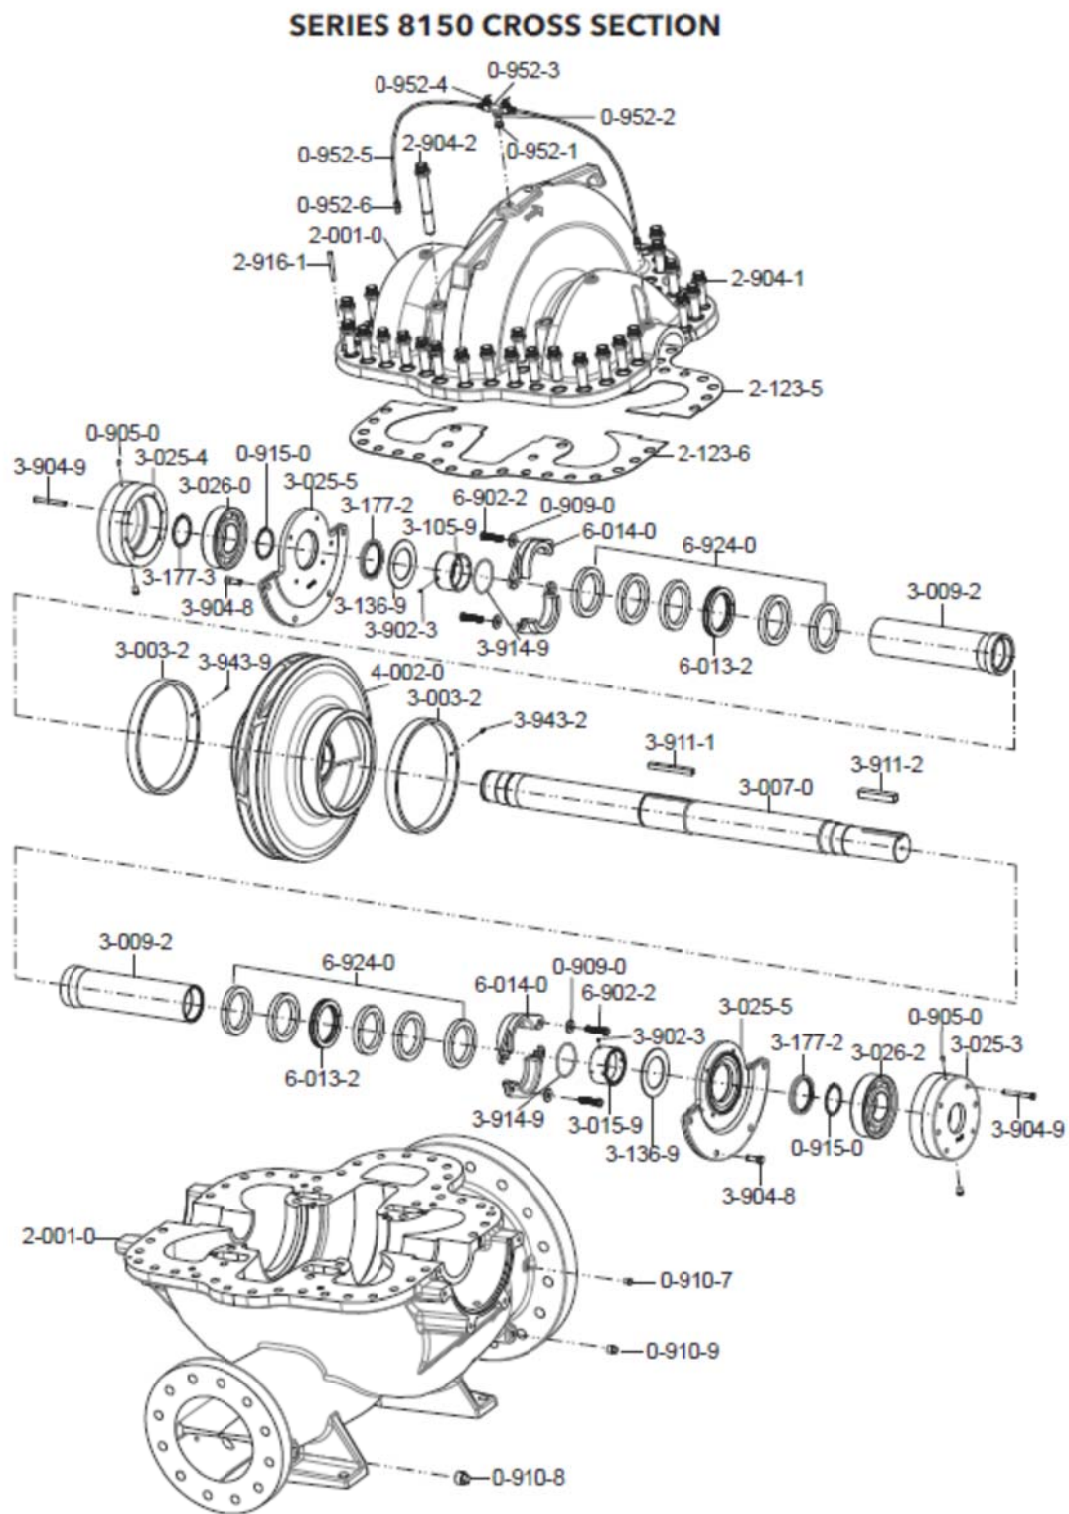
Exploded view of 8150 Horizontal Split Case Fire Pump
